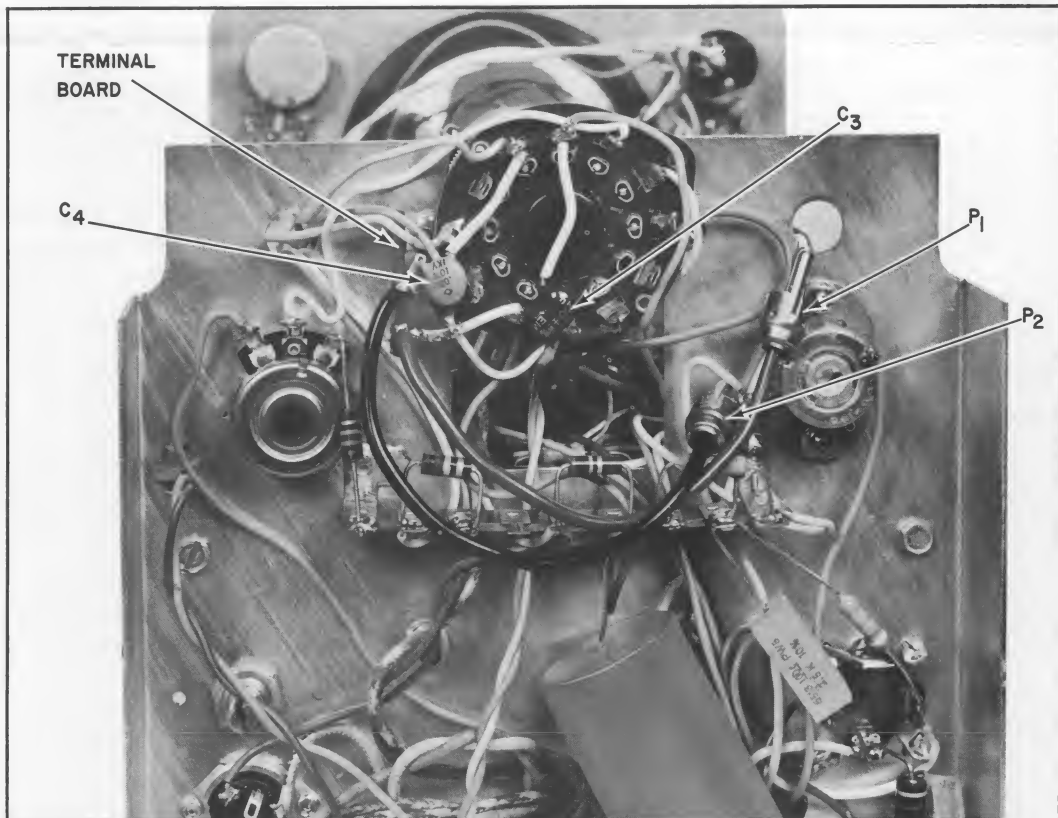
Rear section of chassis at CRT socket showing wiring and connections.
